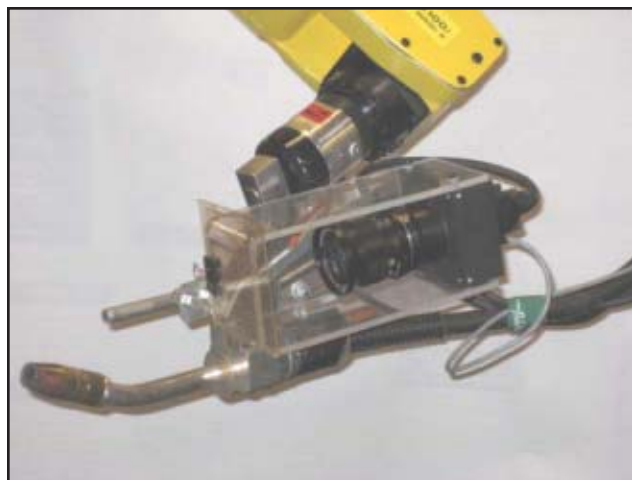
Spatter detection camera. A Balser A504k high-speed camera is mounted on the arm of the robot, about 300 mm from the welding gun tip.
